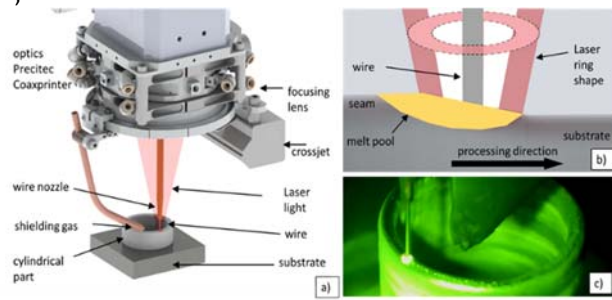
LMWD process: a) processing head; b) laser ring shape and wire; c) deposition process [6]
